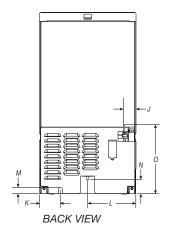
DETAILED PLANNING DIMENSIONS 18" ICE MACHINES
